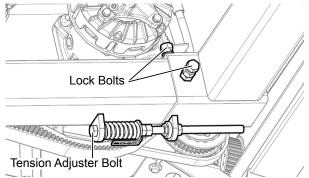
Left Draper 1st Drive Belt Tension Lock Bolts
